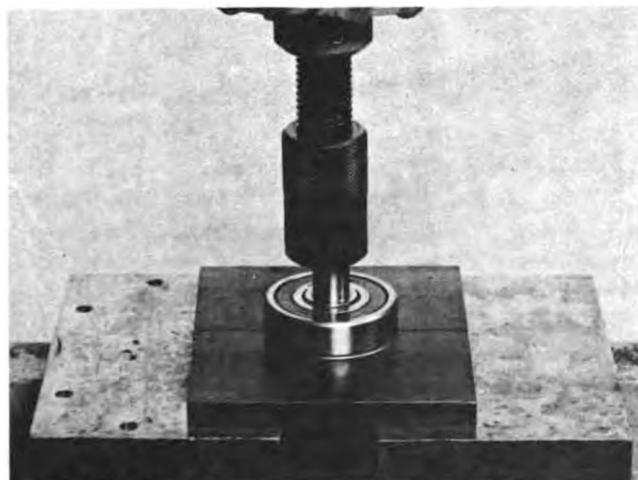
(N10848). Push The Shaft From The Bearing.
